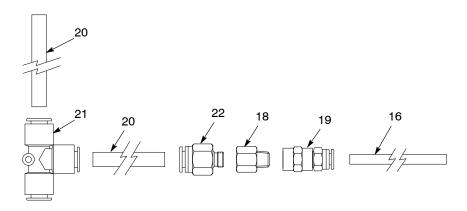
Bulk Feed Fluidizing Pickup Tube Kit (3/8-in. and 10-mm)
